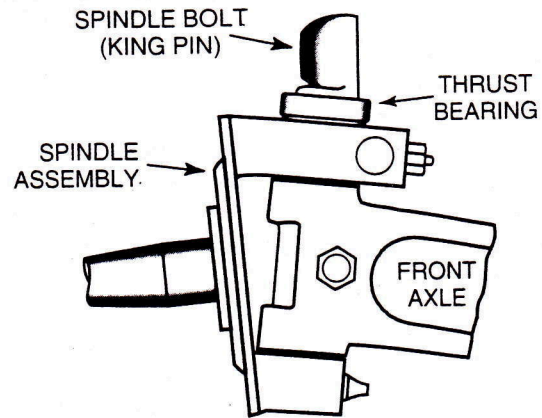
Thrust bearings support a lot of weight - ensure quality.
